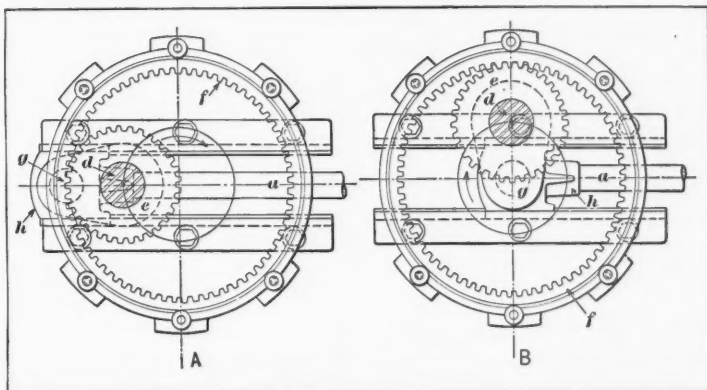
Planetary Gear and Crank from which Reciprocating Motion is derived
